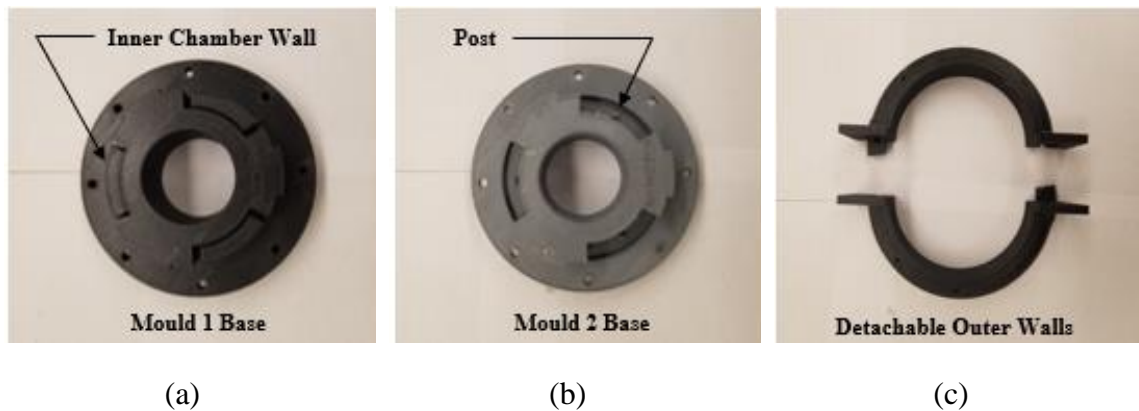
Top view of the (a) base for Mould 1; (b) base for Mould 2; and (c) detachable outer walls.
